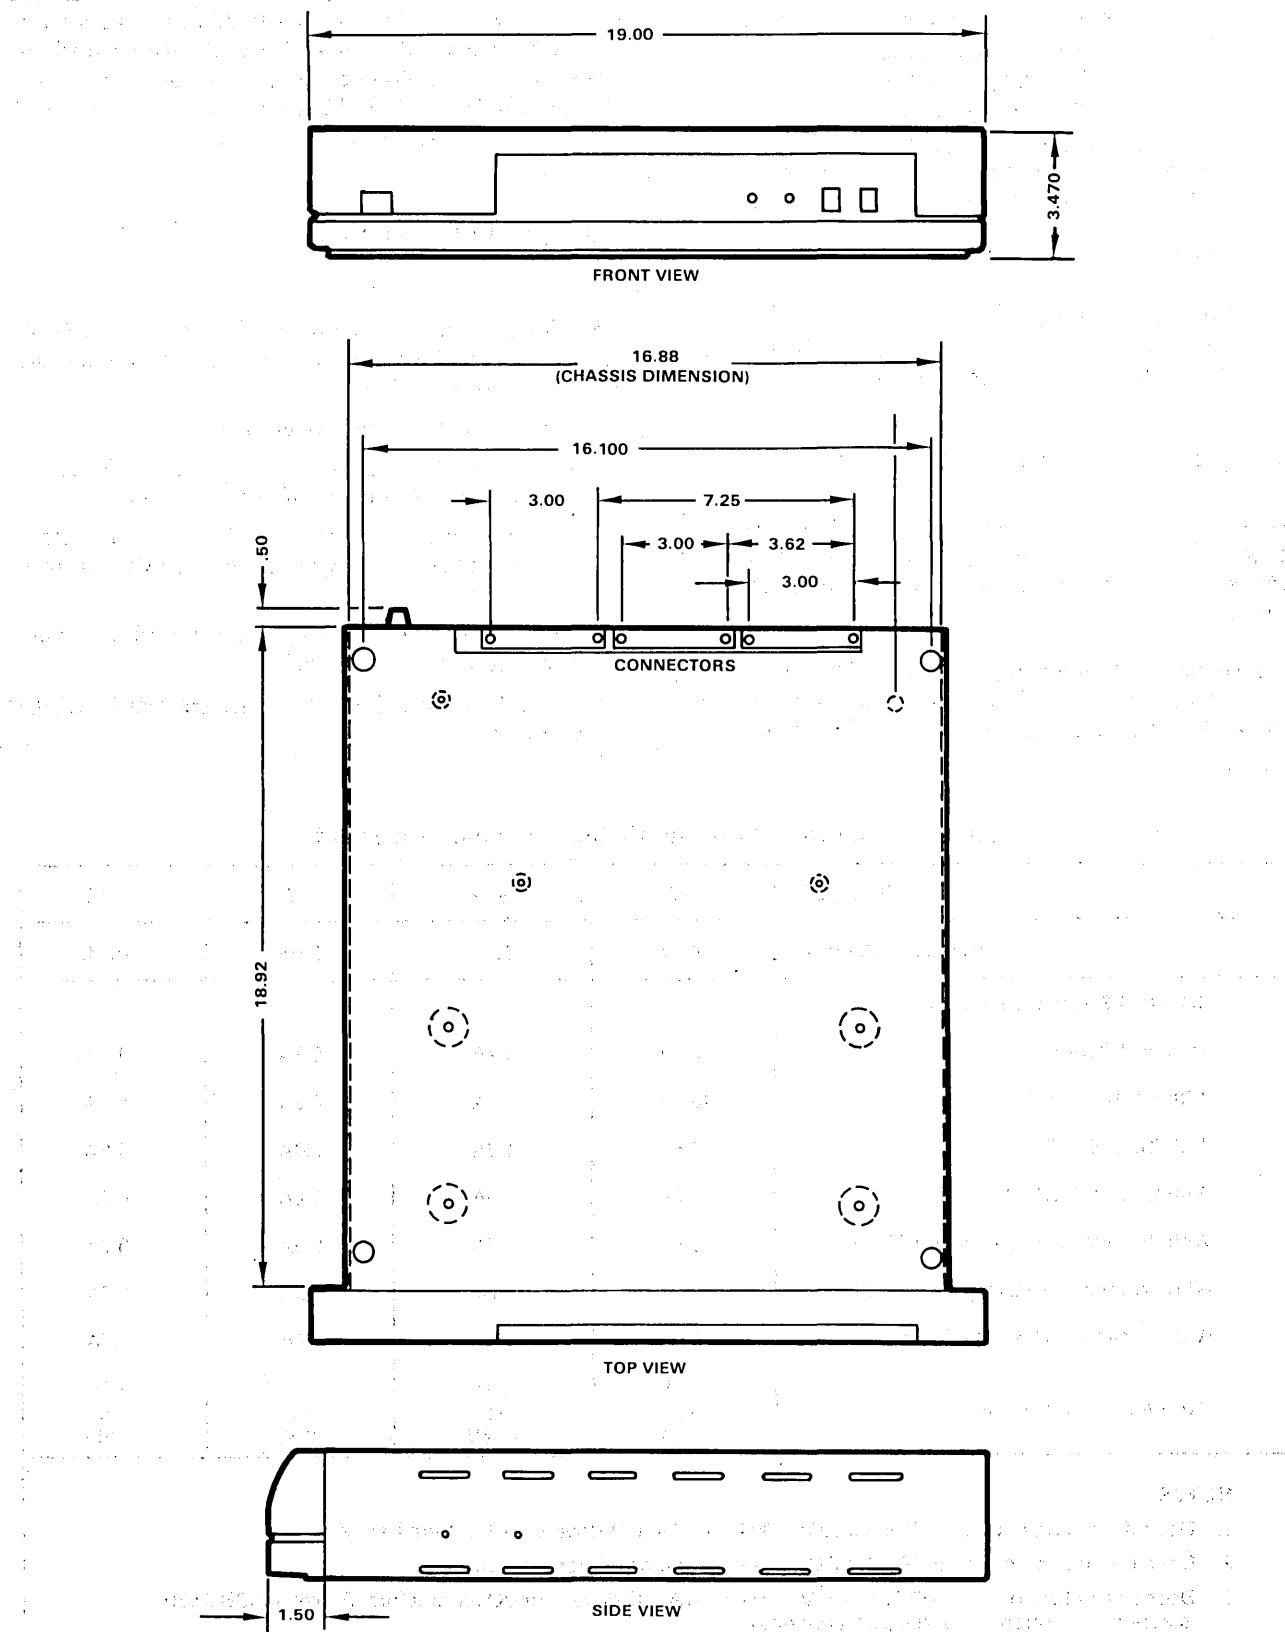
System 80/30 Outline Dimensions (Inches)
